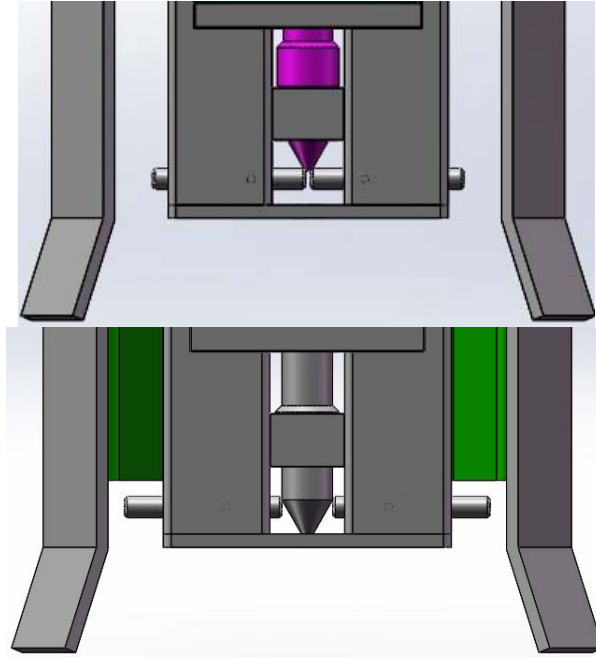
Unlocked, seal high, pins retracted (left) versus locked, seal in lower position, pins extracted (right)
